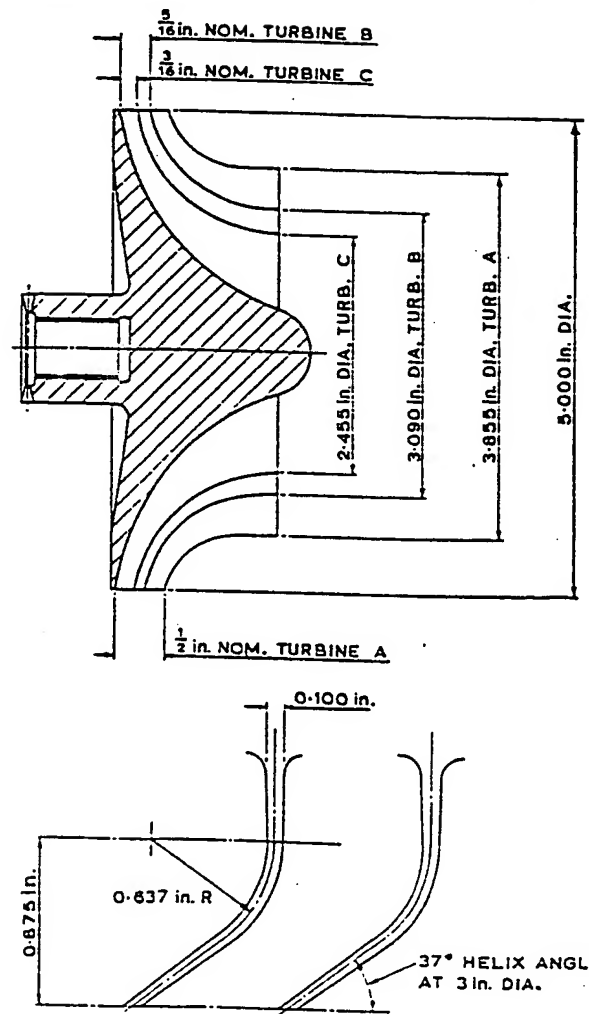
Radial inward-flow turbine rotors A, B and C, Ricardo
